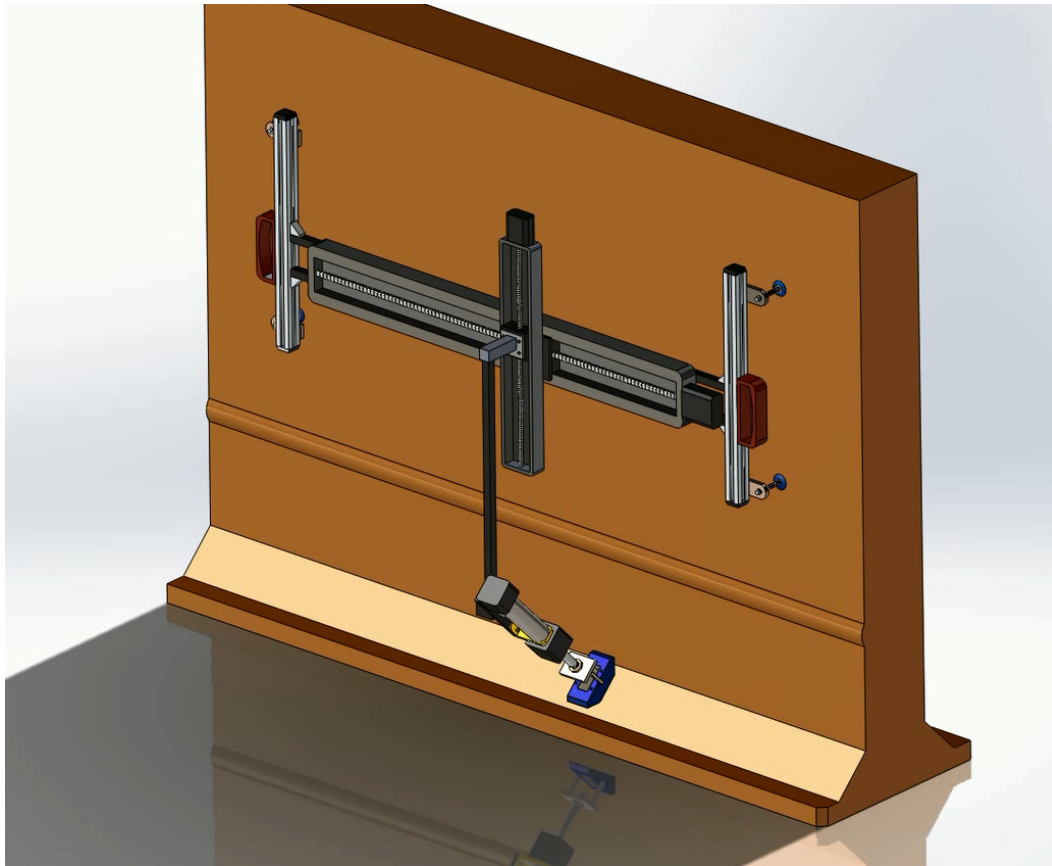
Final PolyTank scanner concept design for the base fillet weld.
